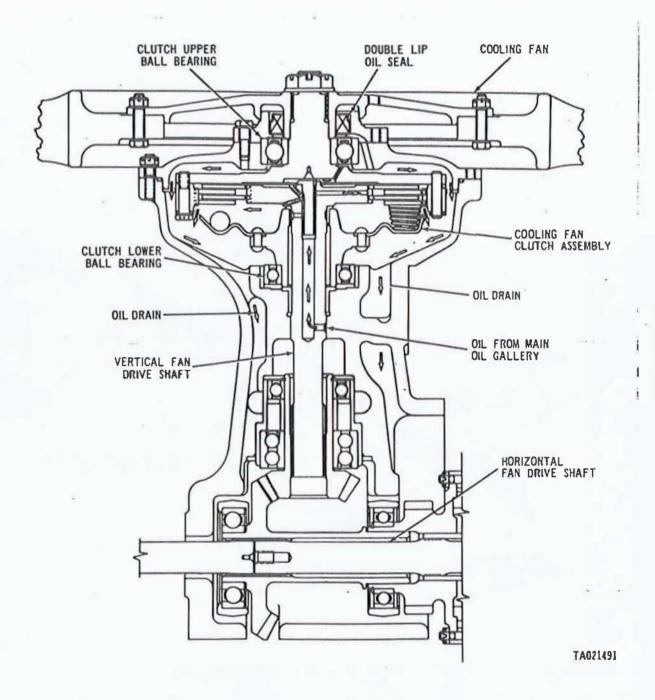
Mechanical cooling fan clutch - sectional view.
